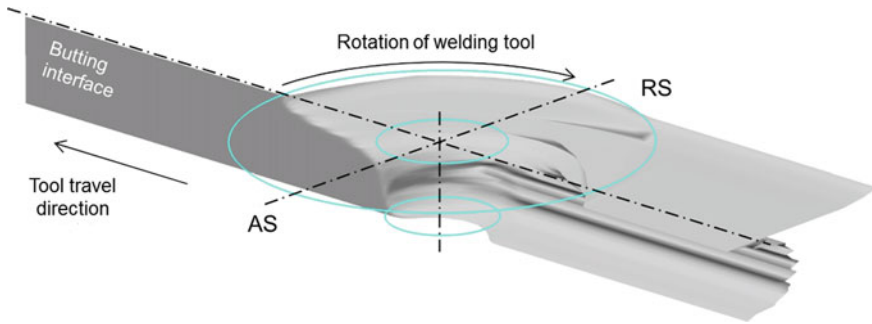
Morphology of the butting interface during FSW. The corresponding tool rotation and welding speed during FSW is 800 rpm and 40 mm/min. AS denotes the advancing side, while RS denotes the retreating side
